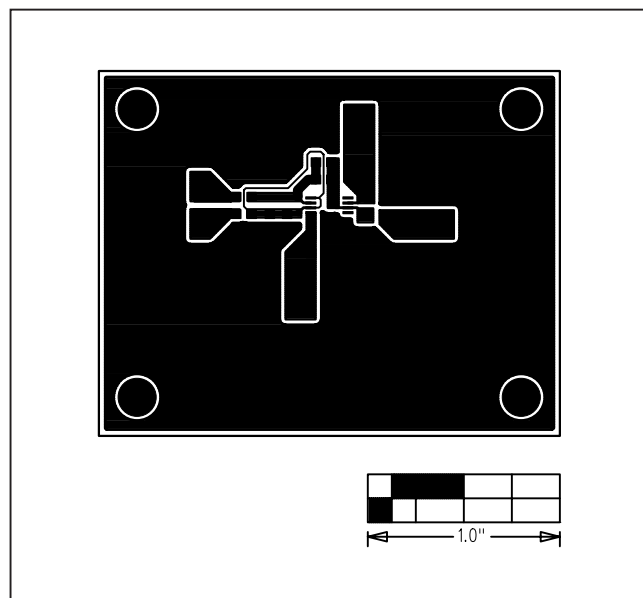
MAX9945 EV Kit PCB Layout—Component Side
